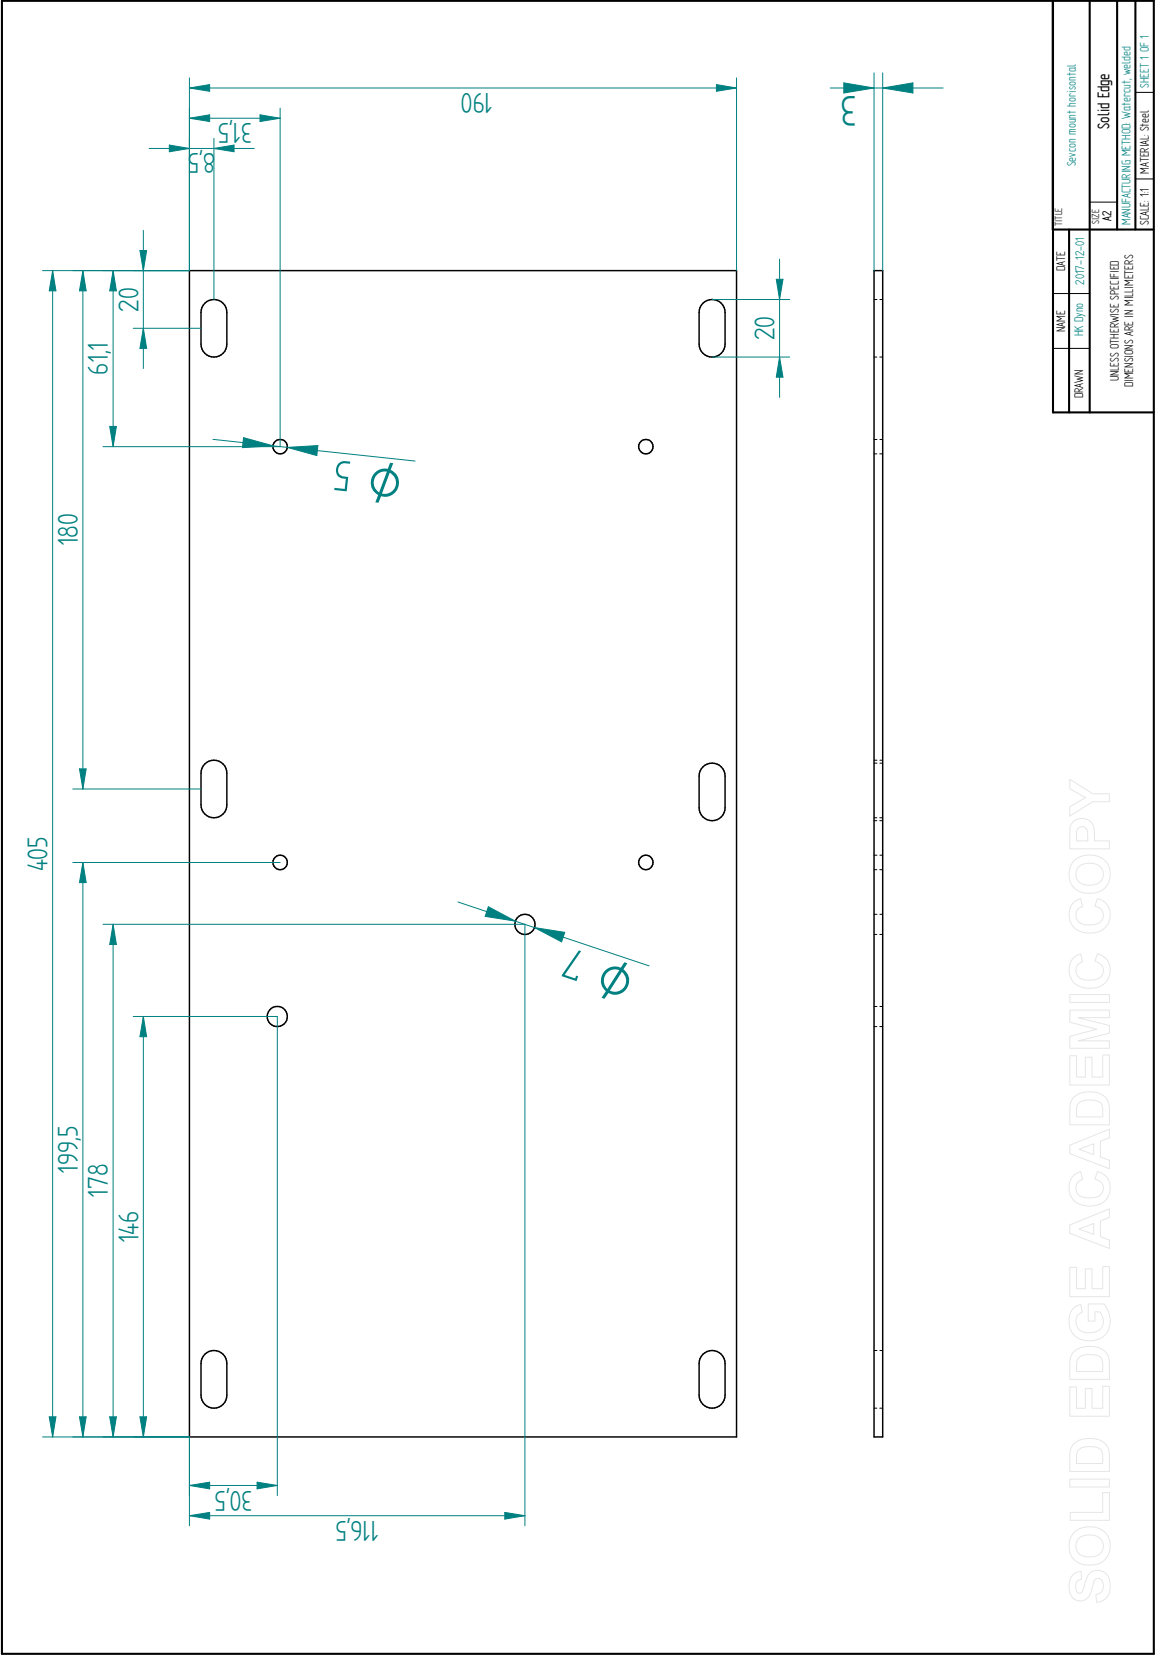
Drawing of the horizontal part of the Sevcon controller mount.
